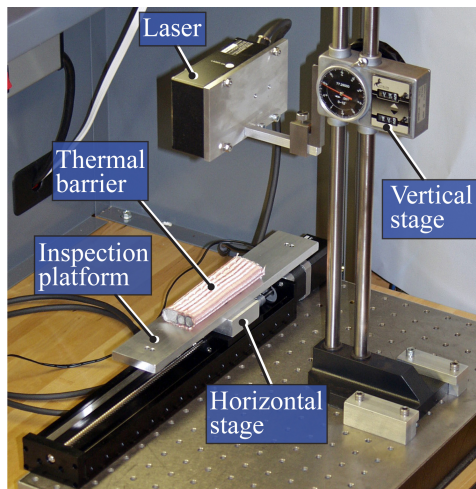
2-D laser inspection system for thermal barrier dimensional profiling.
